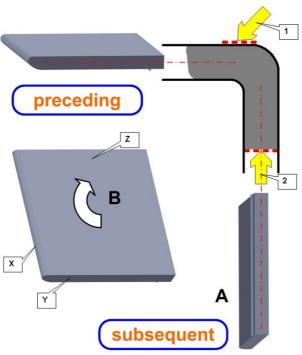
Schematics of route A+B and planes X,Y,Z for workpiece investigation applied for IECAP of rectangular plates: 1-punch (shearing), 2-pusher (feeding)
